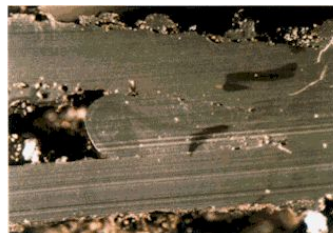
Microscopic View of Textured Edge Welding Revealing Voids at Edge and Base of Squeeze-out
